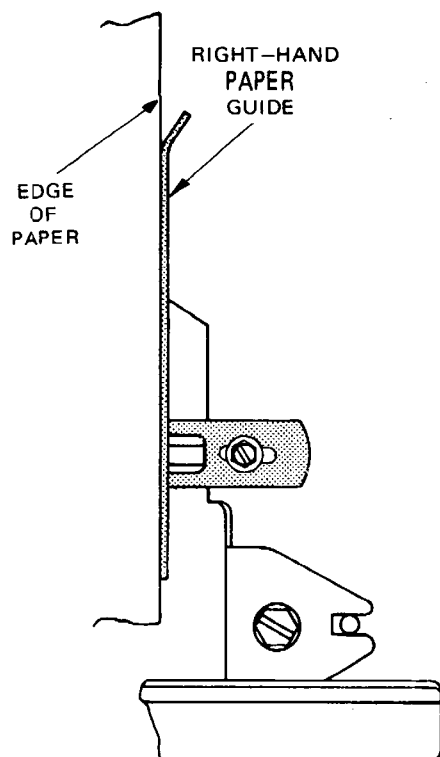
RIGHT-HAND PAPER GUIDE
